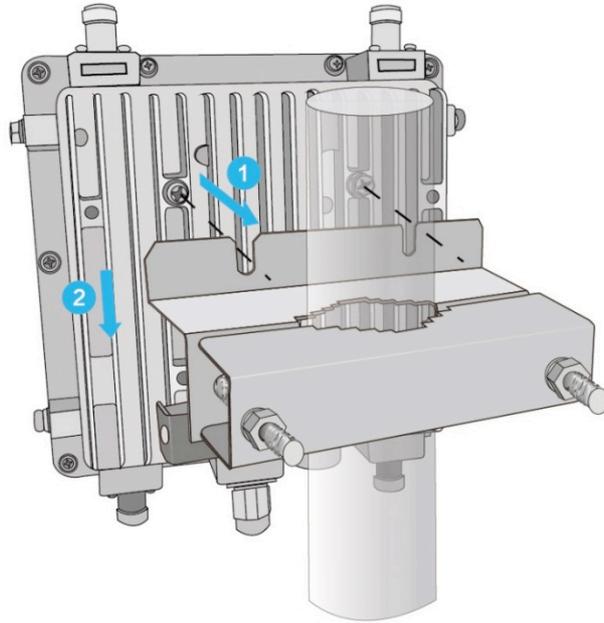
View 1 of Installing AP on the Mounting Bracket
